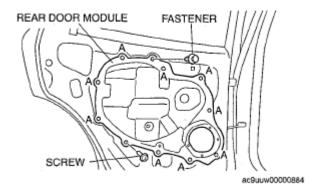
Identifying Rear Door Module With Screws And Fastener Courtesy of MAZDA MOTORS CORP.
